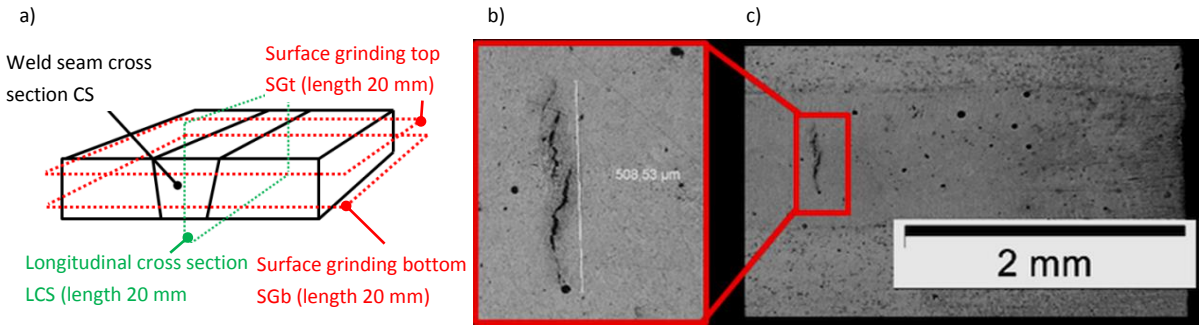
(a) Schematic drawing of metallographic preparation in cross section (CS), longitudinal cross section (LCS) surface grinding on top (SGt) and bottom (SGb); (b) magnified hot crack with measured length in c) an exemplary surface grinding on top side (SGt)
